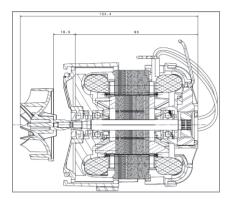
A section view of a 2000s brushless motor with the impeller mounted on its shaft.
